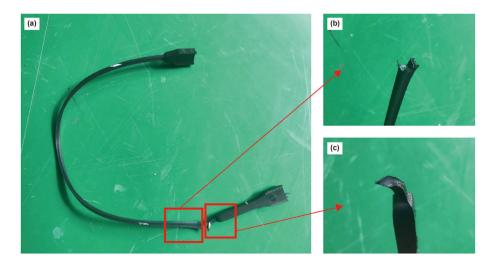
Tensile fracture surfaces of polyethylene pipeline sample; (a) Fractured sample profile, (b) fracture surface of the extended sample part, and (c) fracture surface of the short sample part.
